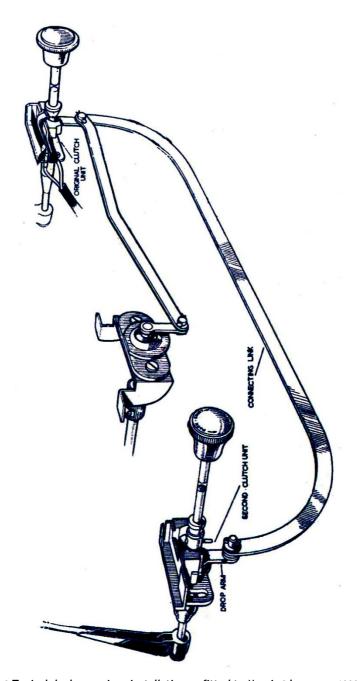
Typical dual arm wiper installation as fitted to Morris 8 h.p. cars 1939-47
